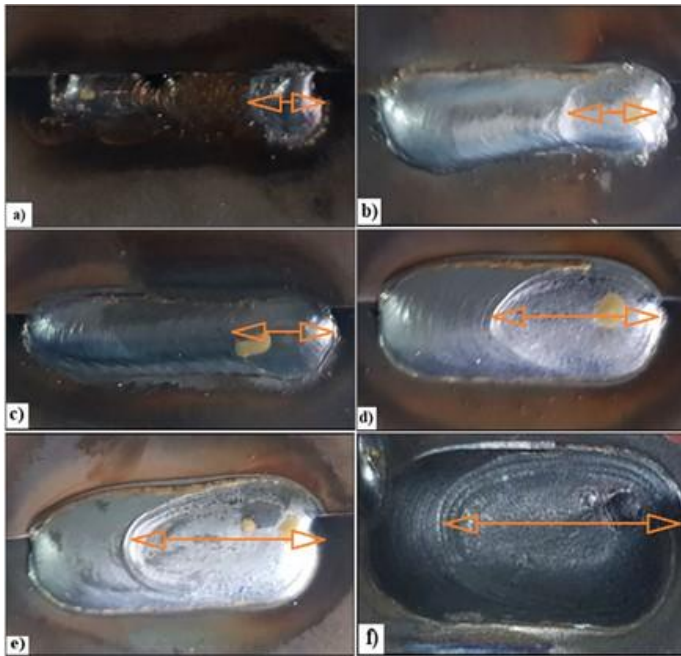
Appearance of GMAW weld beads deposited at different weld wire feed rates, a) 2 m/min, b) 4 m/min, c) 6 m/min, d) 8 m/min e) 10 m/min f) 12 m/min.
